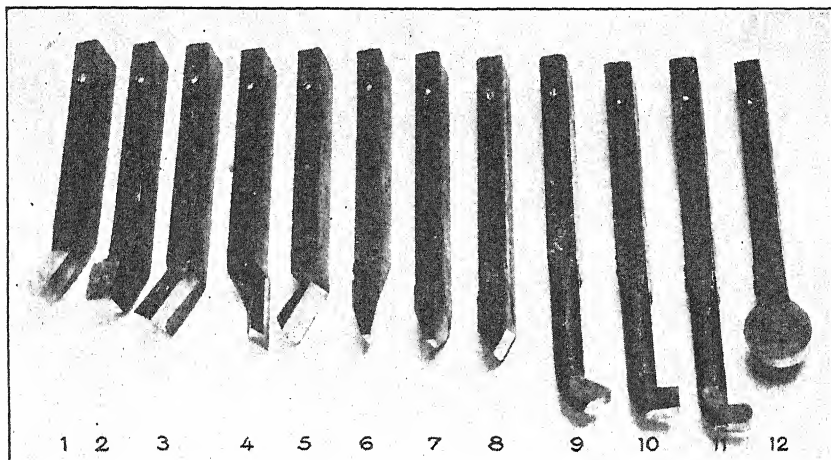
A Selected Set of Forged Shank-Type Tools.
